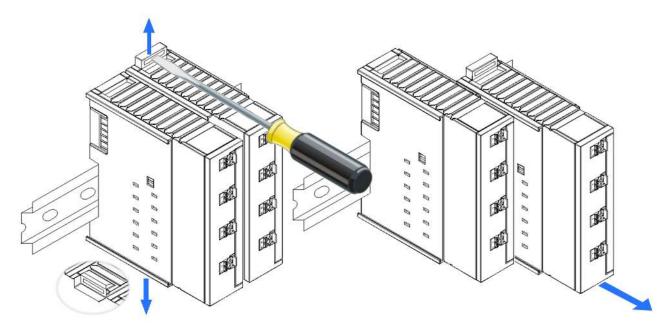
Opening of the upper and lower mounting rail lock and pull out the ELM terminal module
